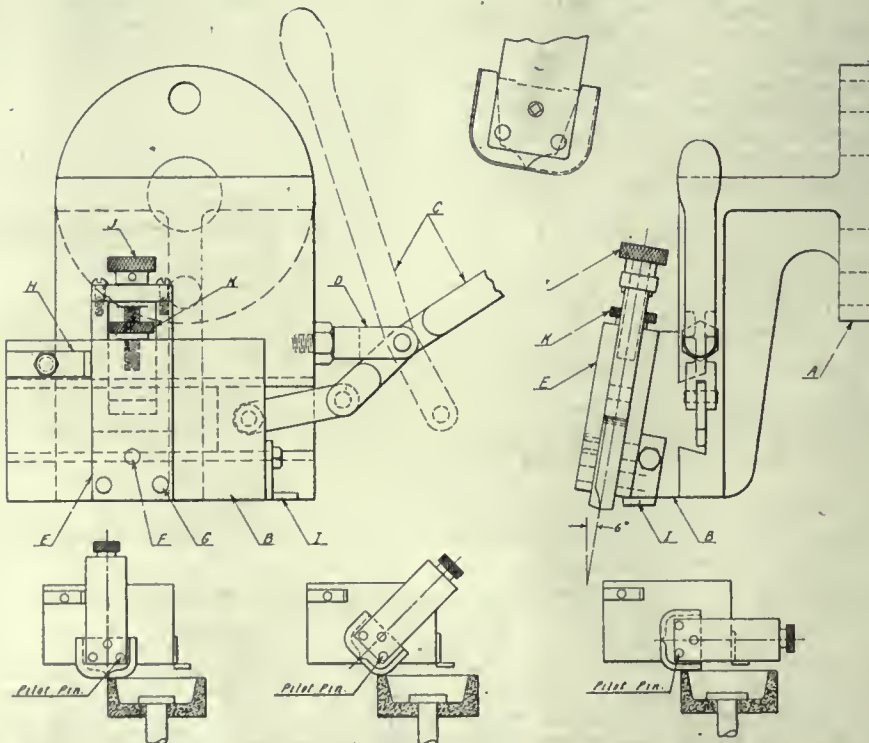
RADIUS GRINDING FIXTURE 18 PDR. H.E. SHELLS.
